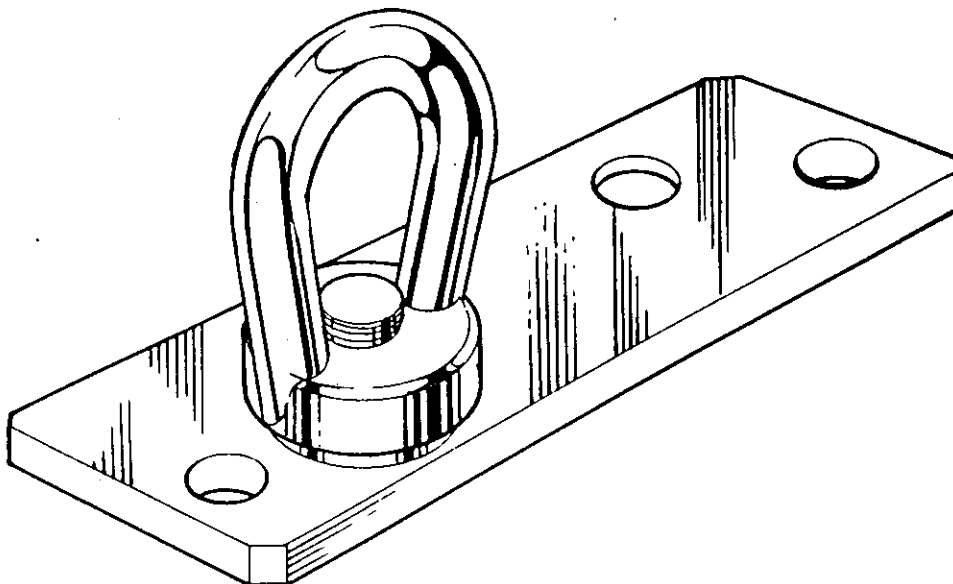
Engine lifting attachment No. 61 6002.
